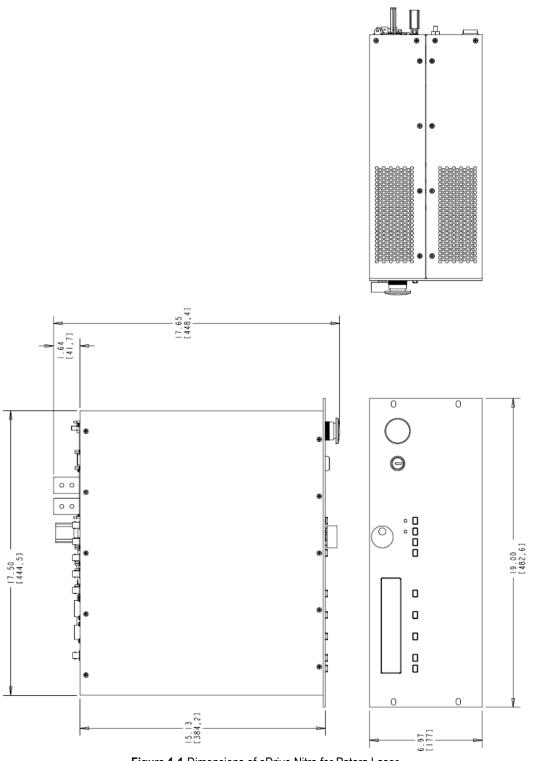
Dimensions of eDrive Nitro for Patara Laser
